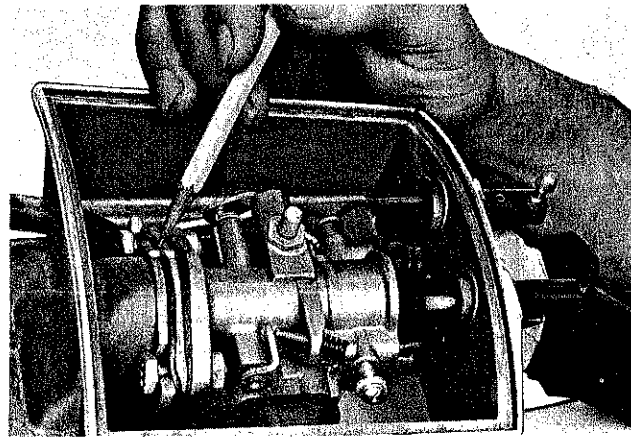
Note that there are pins on the carburetor adapter and the airbox flange to assist in proper installation of the gaskets and adapter.
